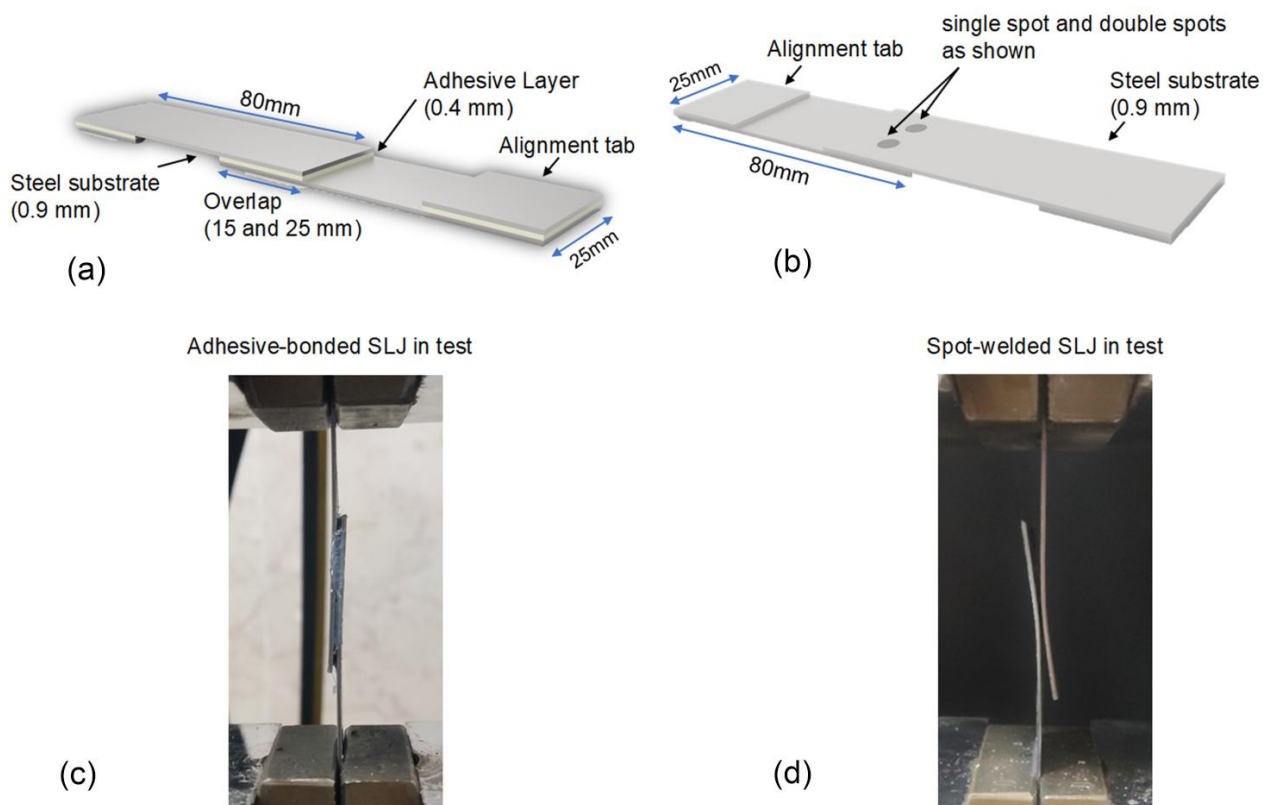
Single Lap Joint (SLJ) specimens and test setup.
